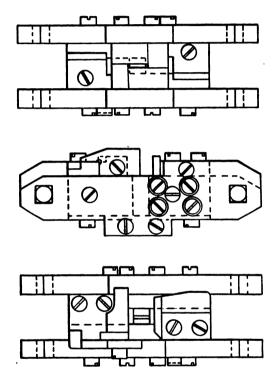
Pivotal-machine mould*. Scale: half size. Tang end elevation; plan; matrix-end inverted elevation.
